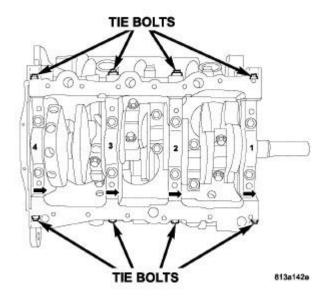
Main Bearing Cap Identification & Bolts Courtesy of CHRYSLER LLC
